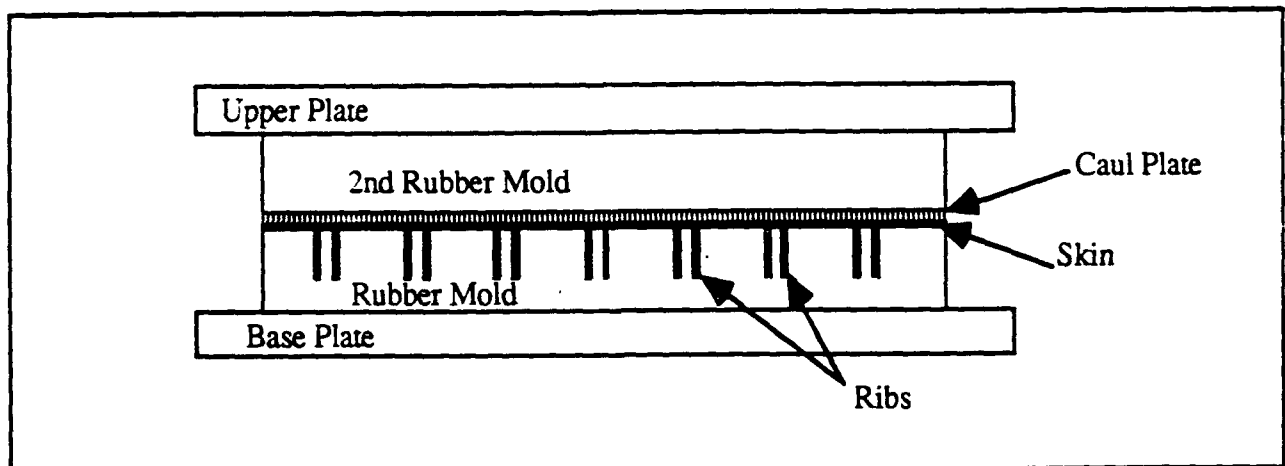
Alternate tooling ("two-rubber mold" setup) used in original manufacturing of isogrid panels. The upper and lower plates were 0.5 in thick K-100 aluminum. The caul plate was 0.060 in thick stainless steel. The grooves in the second rubber mold are not shown. No prepreg material was wound into or laid up on the second rubber mold.
